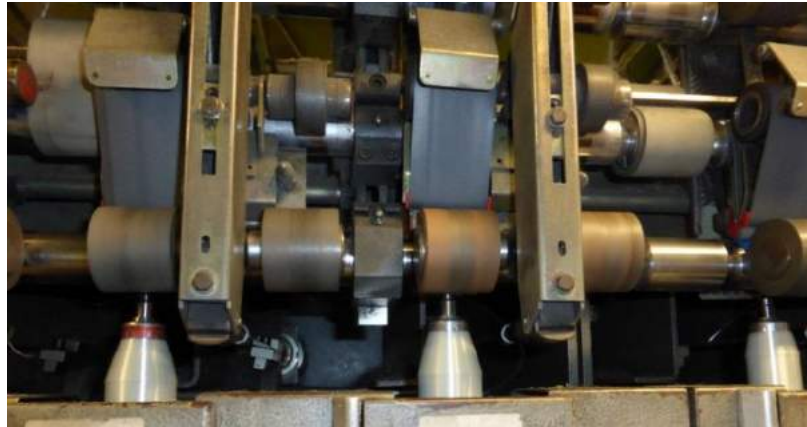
Drafting unit and hollow spindle at Schappe Techniques
